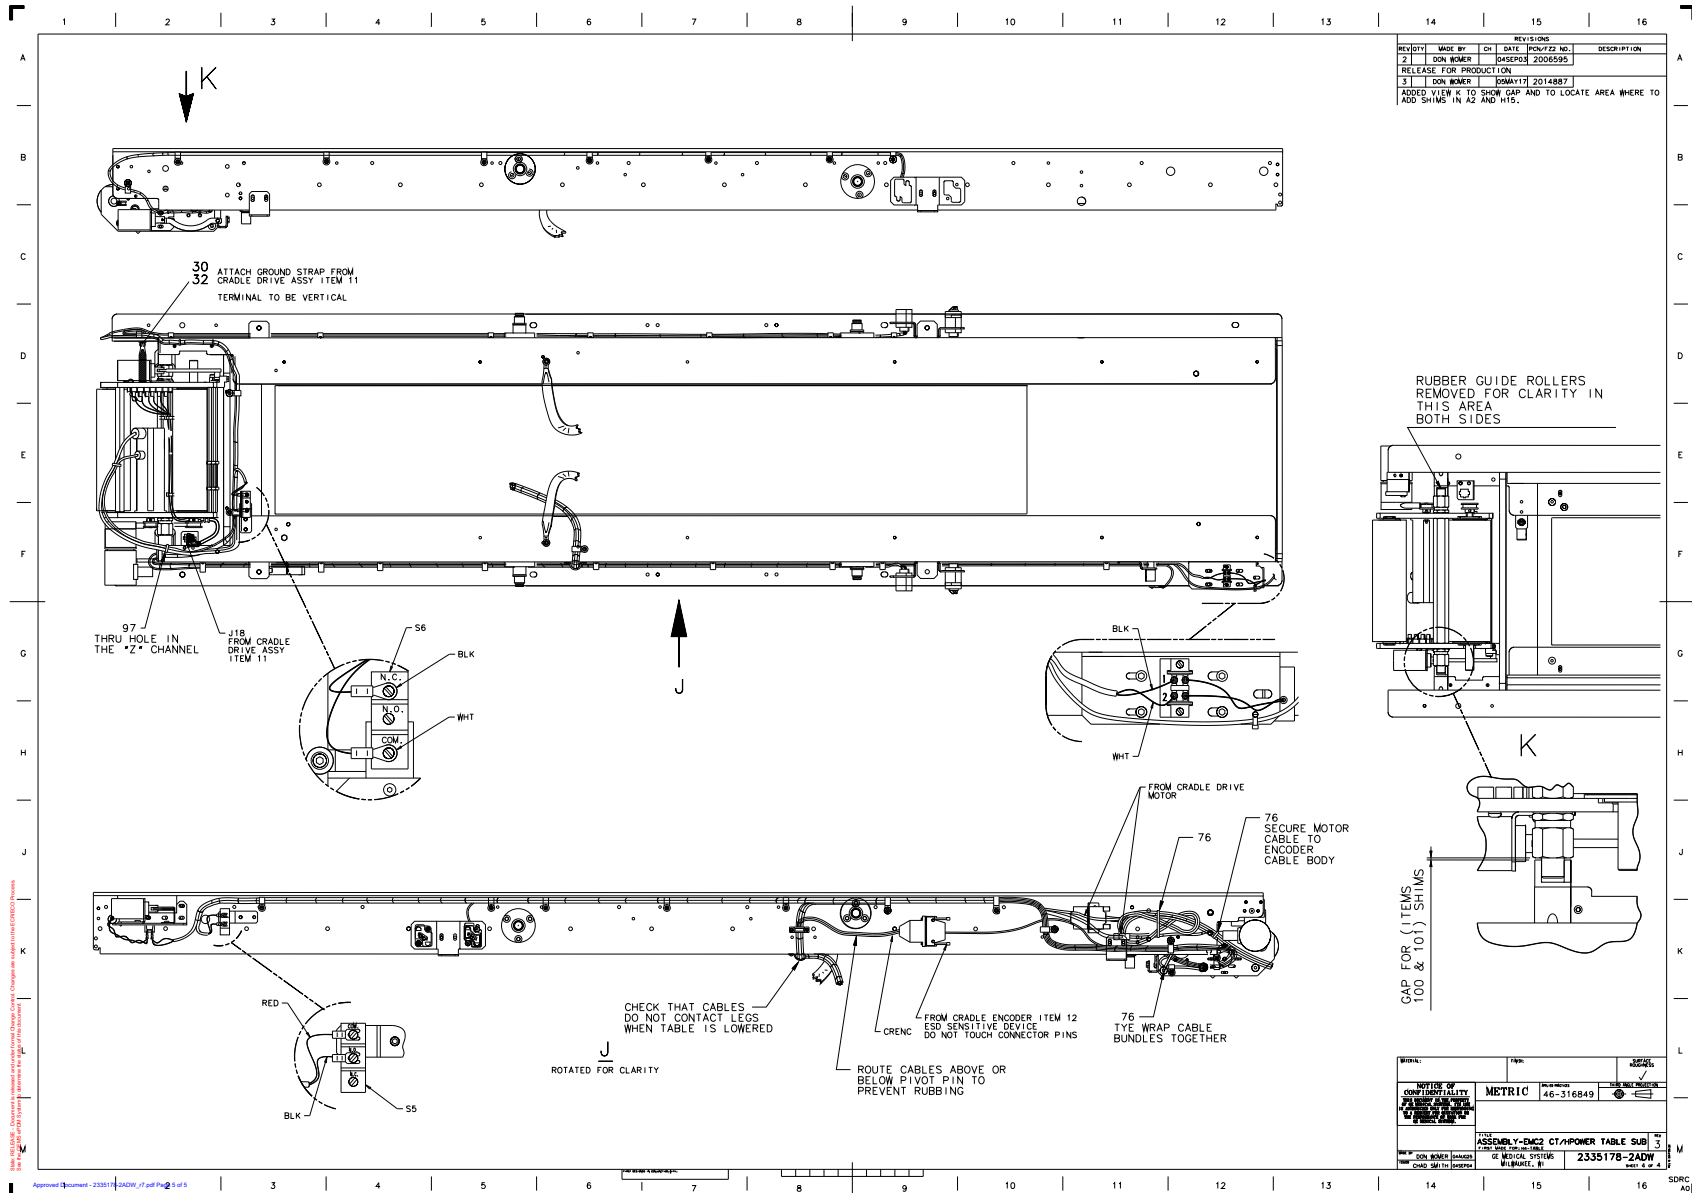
Table Subassembly (2335178-2, sheet 4, rev 3)
